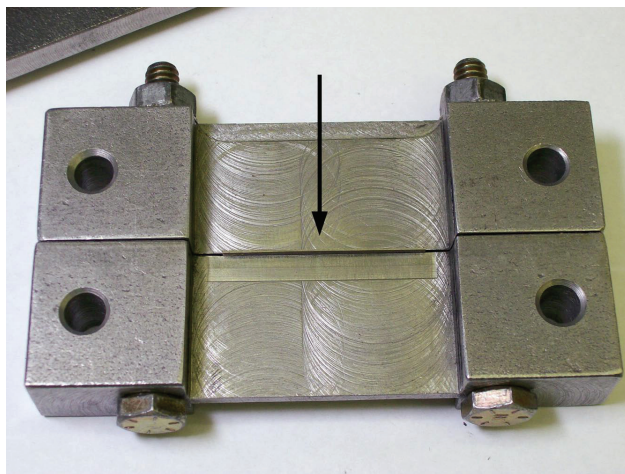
Alumel bending clamps side view (outer guide plates are not installed). The arrow shows the direction for the die to bend the alumel piece.
